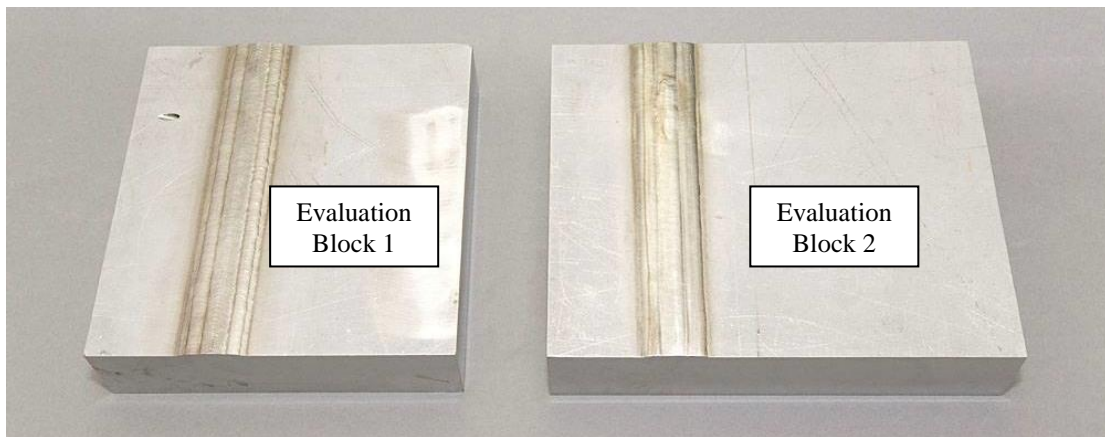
Photograph of the two flat plate, non-welded test-pieces.
